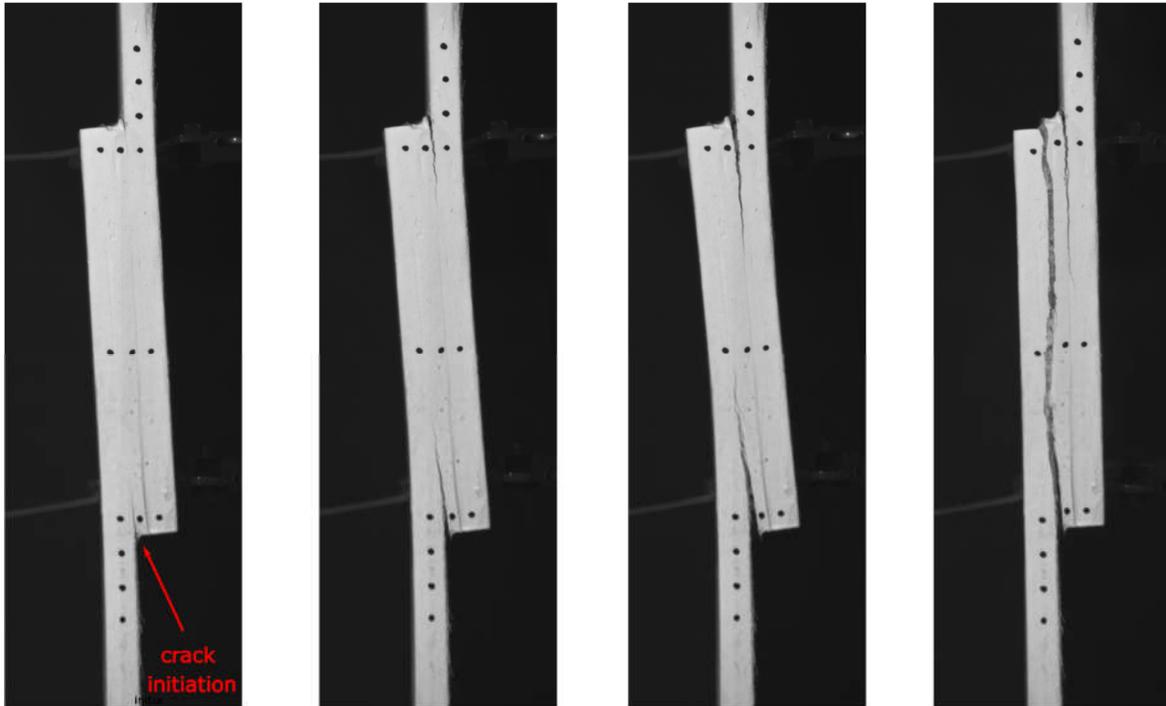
Single lap bonded joint specimen failure mechanism for both adhesives.
